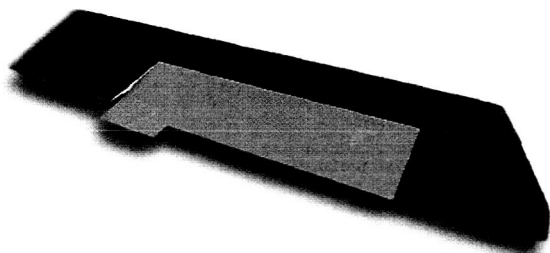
Prototype Heliflap™ installed in an OH-58 rotor blade.
